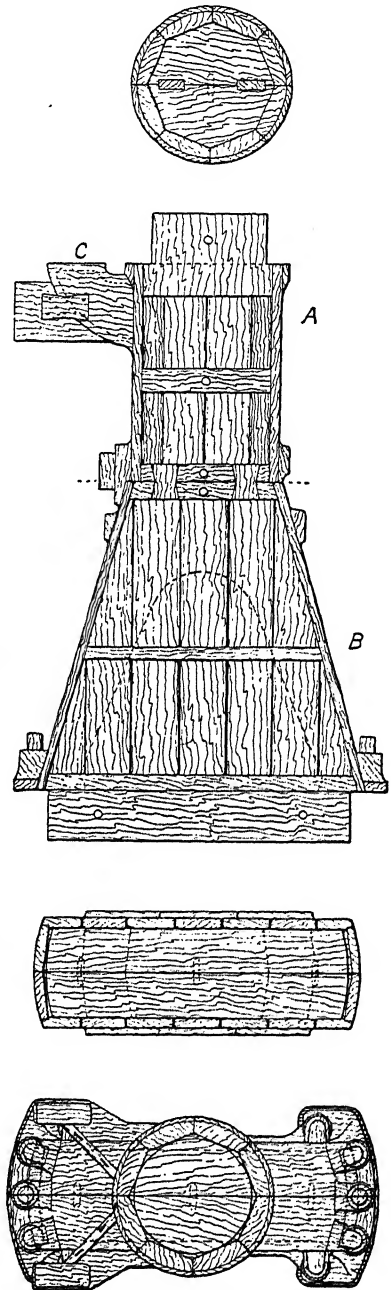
Pattern of Diesel Engine Cylinder and Base
